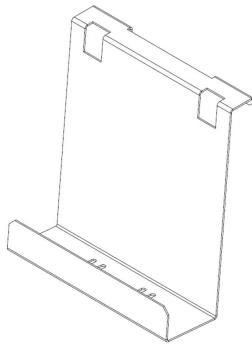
HPX-AC-MB HYDRAPORT ACCESSORY MOUNTING BRACKET
